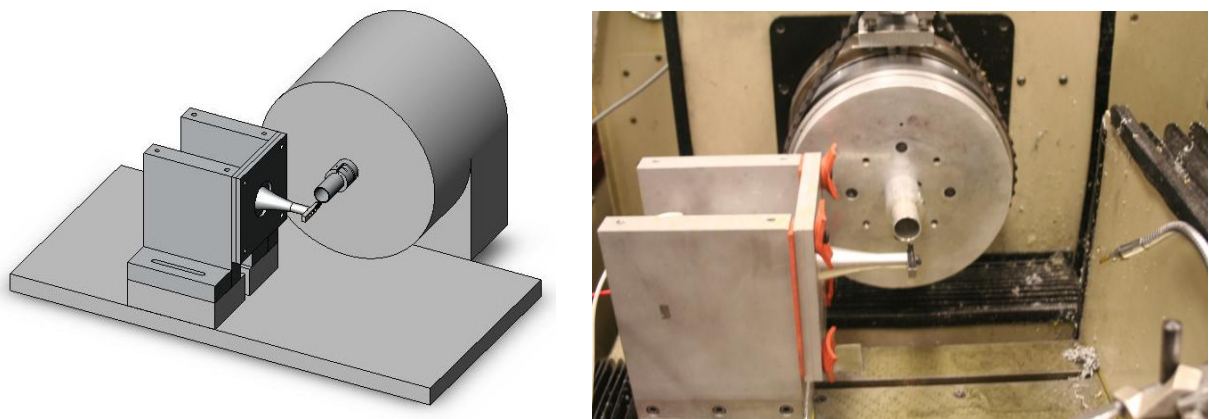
Solid model of the machining experiment and the actual setup on the DTM
